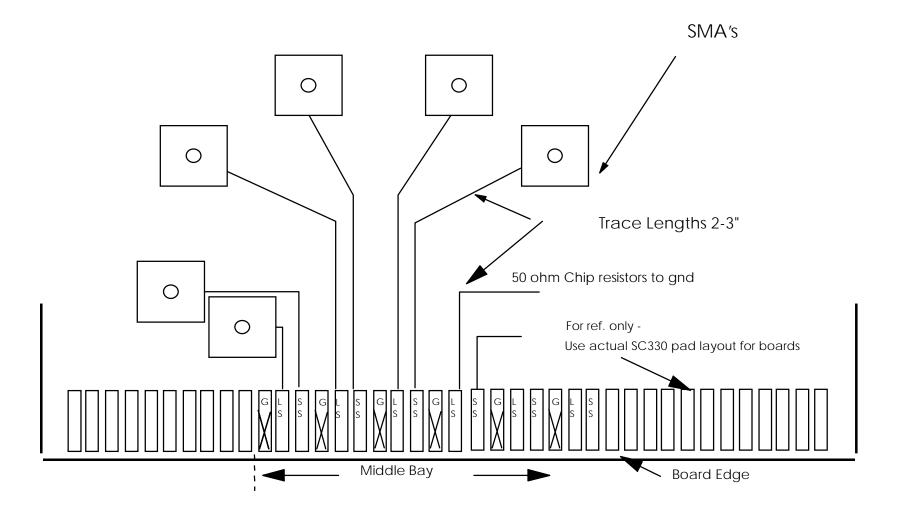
CPU Test Board Layout: Primary (Processor) Side
